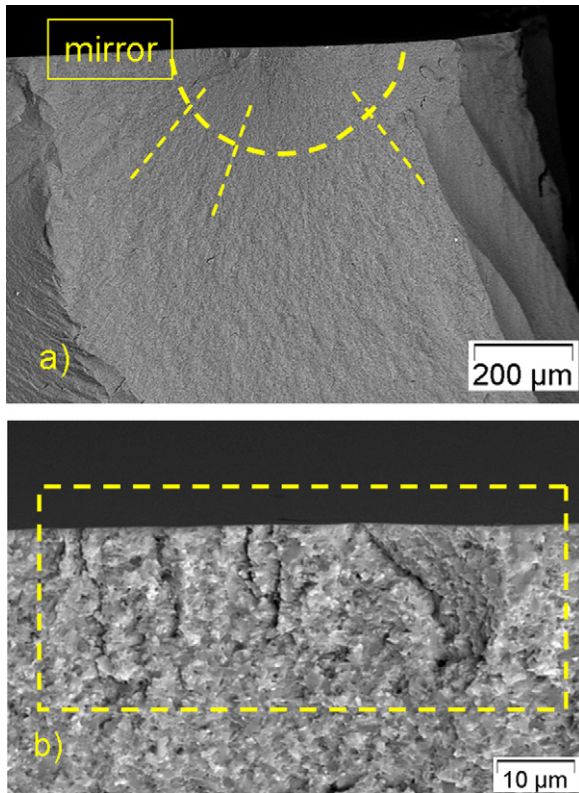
Fracture surface of a fragment of specimen n-G6. This specimen's surface was polished down to 1 μm. (a) Mirror and hackle lines indicate that fracture started at or near the surface. (b) A crack system similar to a coarse “zipper crack”, which is typical for transversely-ground or scratched specimens,²³ was found in this area.
